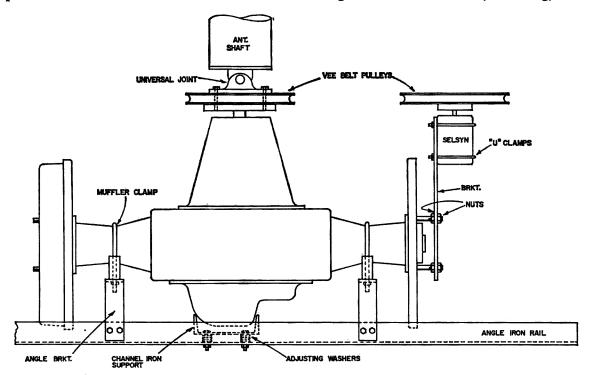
Mounting details of the differential, selsyn drive, and antenna drive shaft. The mounting brackets can be made as shown here, but in the photo, brackets were made of scrap material and the muffler clamps mounted upside down. Either method is satisfactory.
